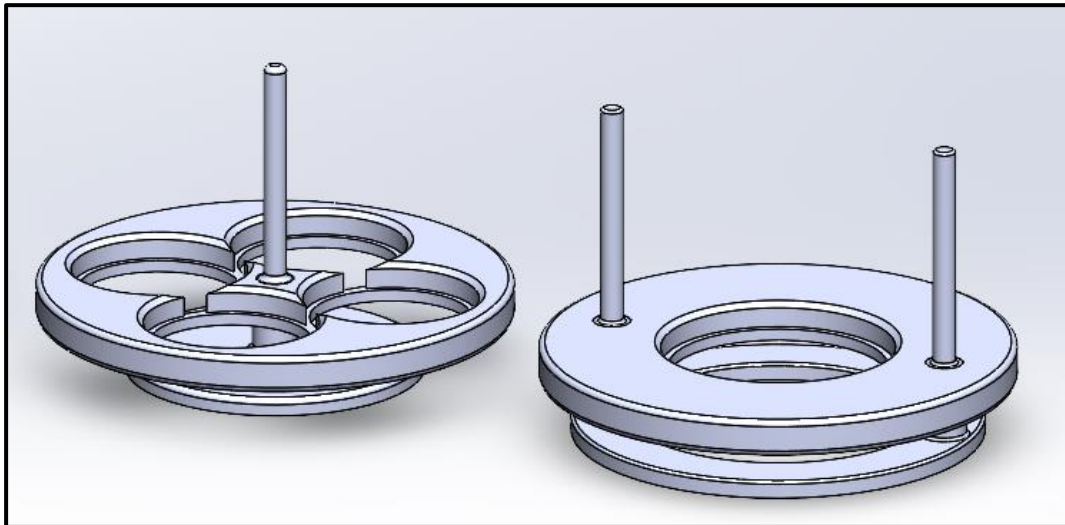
SolidWorks assemblies of Sample Cleaning Fixture for smaller samples (left) & larger samples (right).
